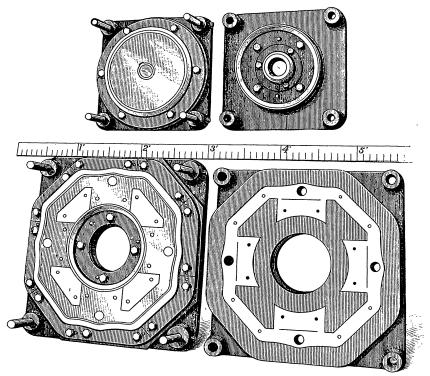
Dies for Cutting Ring and Armature Blanks.
